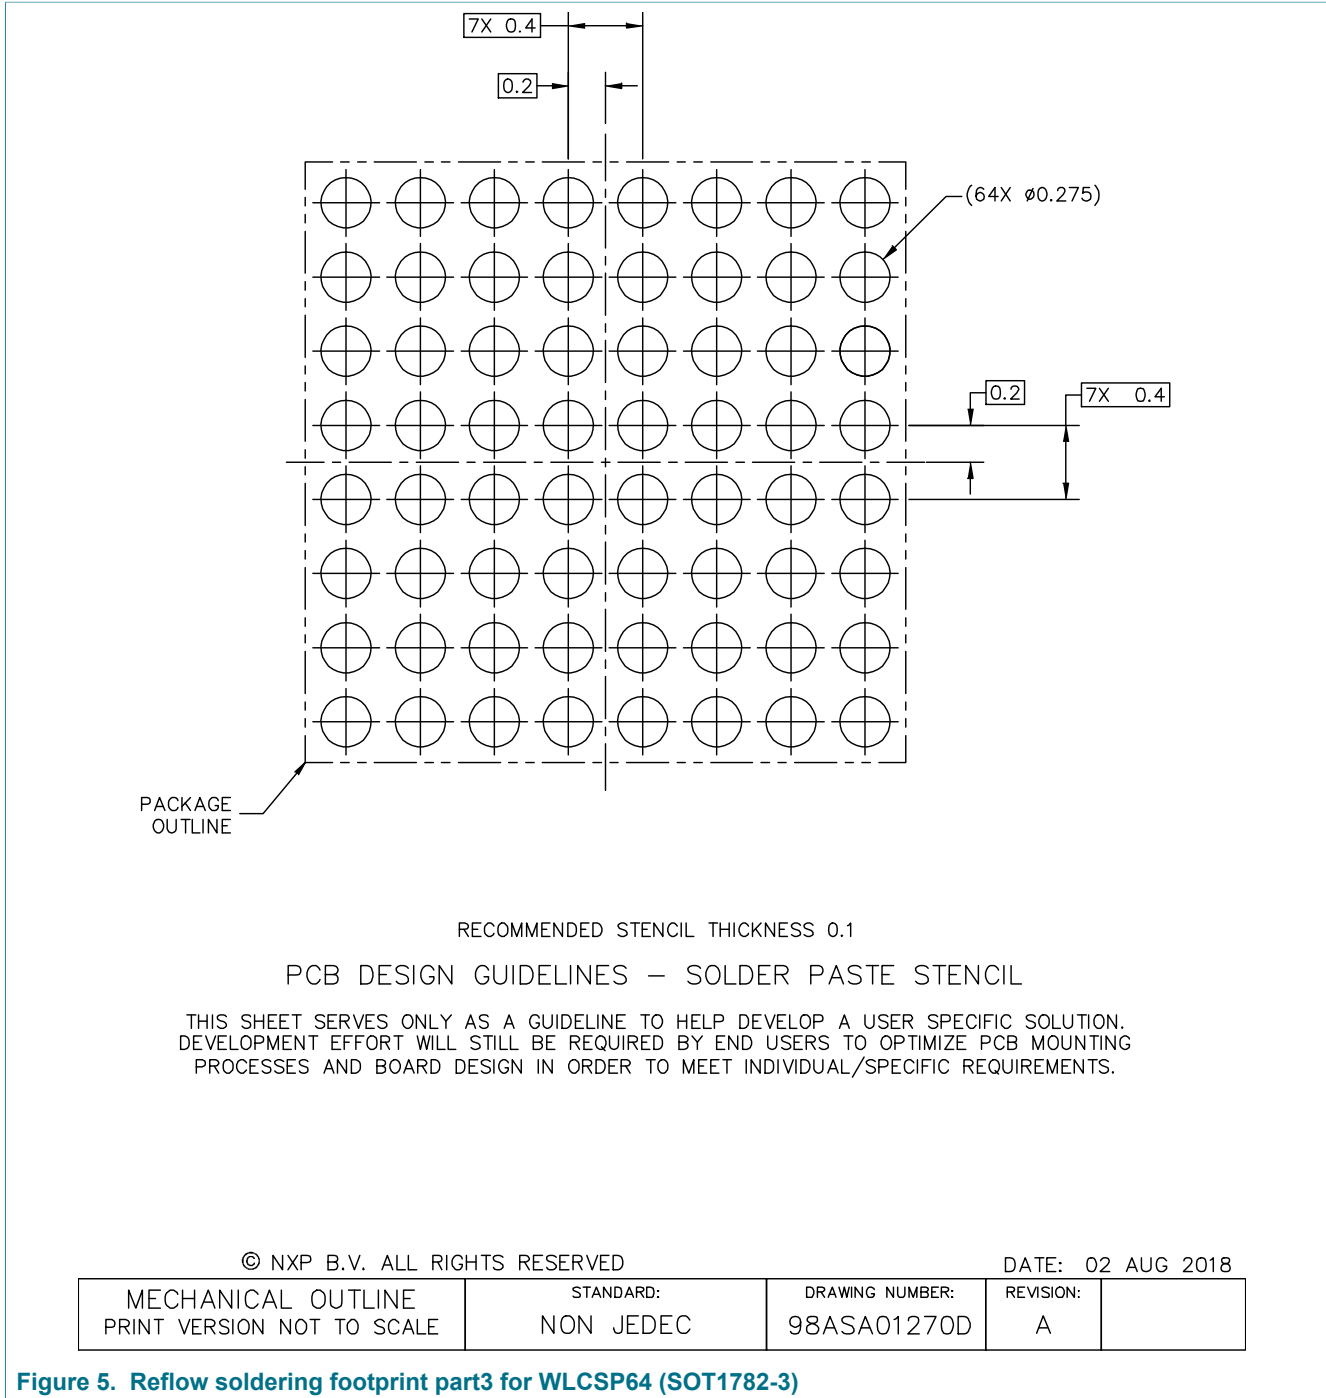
Reflow soldering footprint part3 for WLCSP64 (SOT1782-3)
